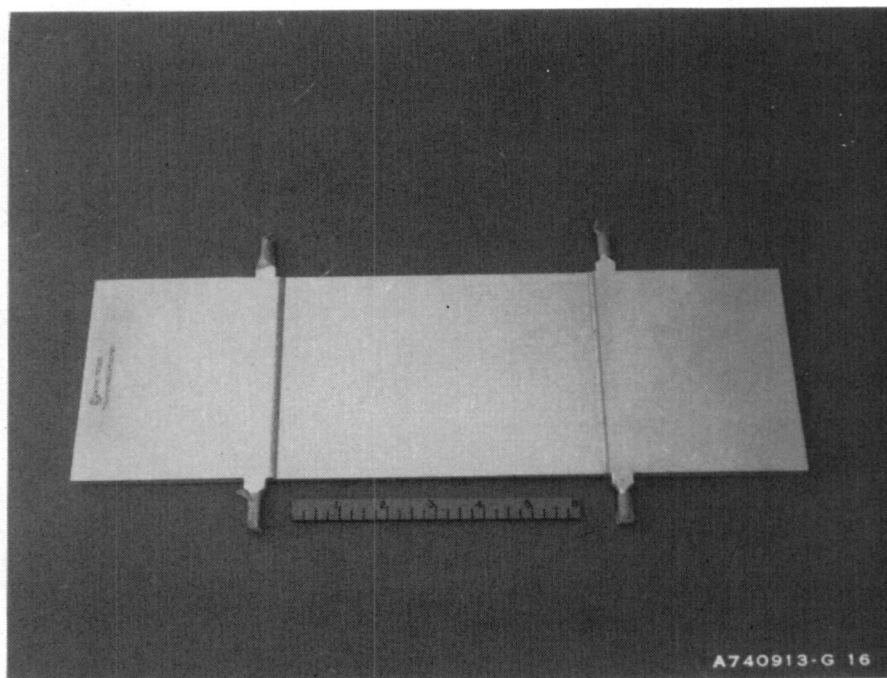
SSTS—Straight Fin Core Panel after Final Machining
